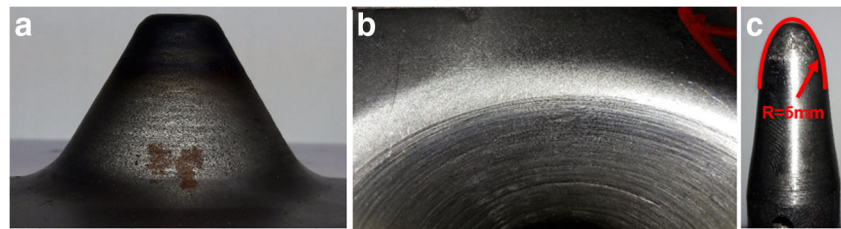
The steel formed part in experiment no. 7. a The outer appearance. b The inner surface. c The tool tip wear
